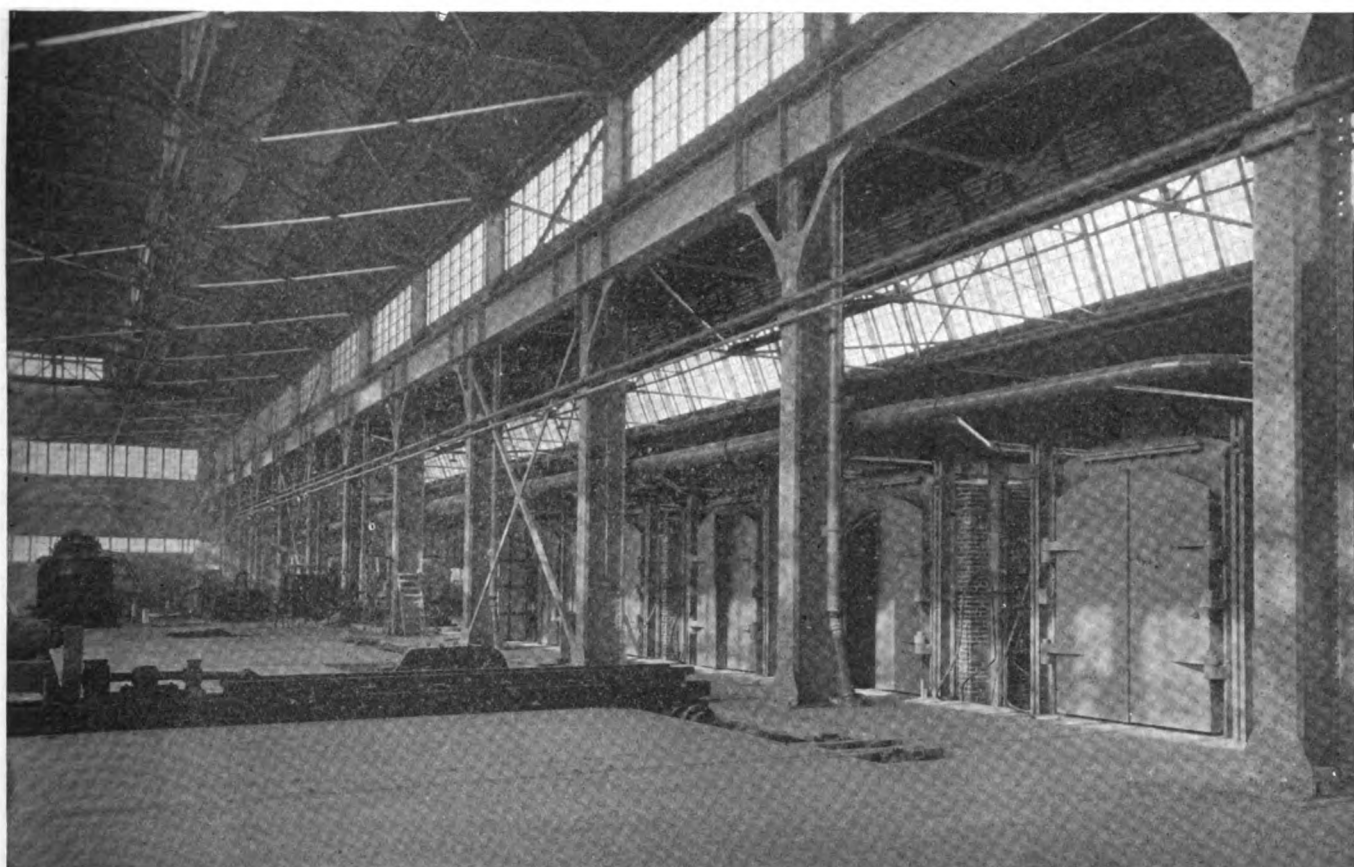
Battery of surface combustion annealing furnaces for monel metal sheets, forming an important part of the sheet mill equipment of the new rolling mills at Huntington, W. Va. Like all of the other furnaces in the new mills, these are fired by natural gas. The large sheets are placed in cast iron boxes, sealed against the air, similar to the process of sheet steel annealing. One of these boxes with its load of monel metal sheets weighs 30 tons. They are inserted and withdrawn from the furnace by a special electric charging machine, part of which appears in the foreground of the photograph.
